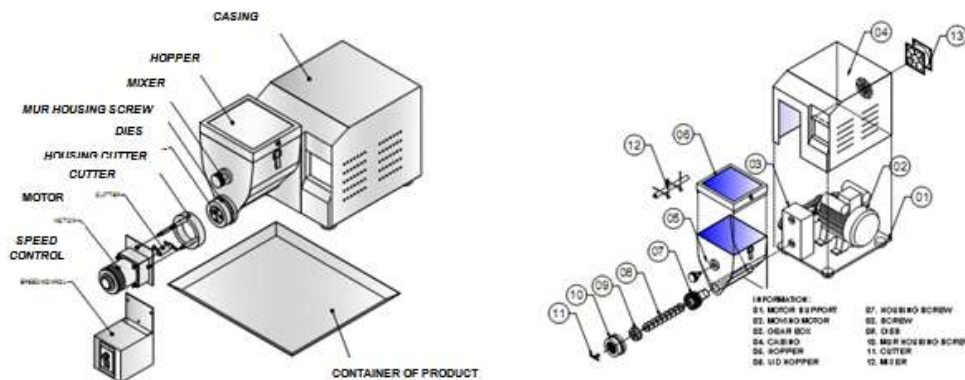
3D Images and Isometric Paste Extruder Machines after Re-Design
